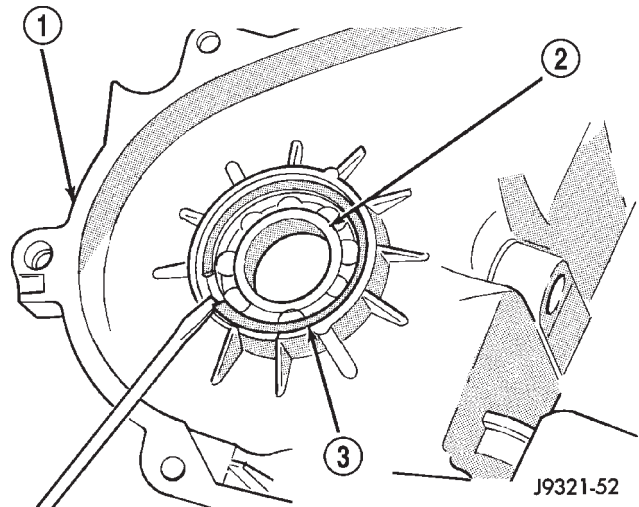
Output Shaft Front Bearing Snap-Ring Removal
